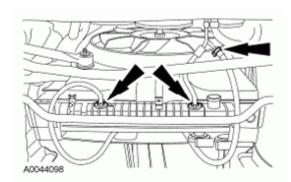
Locating Transmission Cooler Hoses And Clip Courtesy of FORD MOTOR CO.
